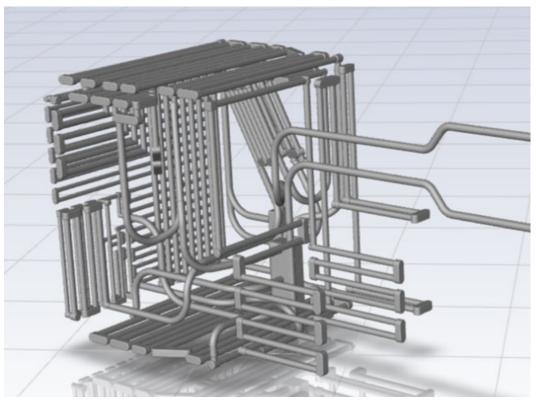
Cooling circuit of the in-vessel First Mirror Unit (Rough dimensions L690mm by W 333mm by H 484mm)
